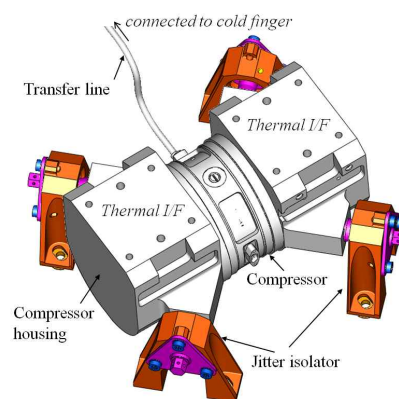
Configuration of Pulse Tube-type Compressor Assembly
